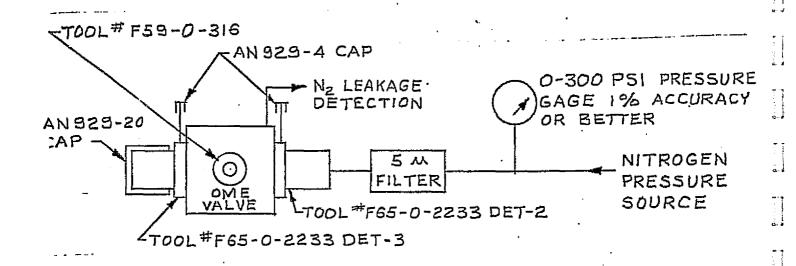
B #1 SHAFT SEAL LEAKAGE
